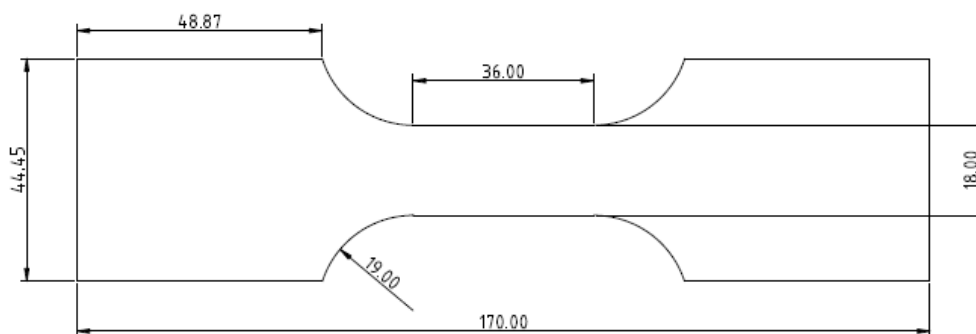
Specimen used for the tension-compression and uniaxial tensile tests [7].
